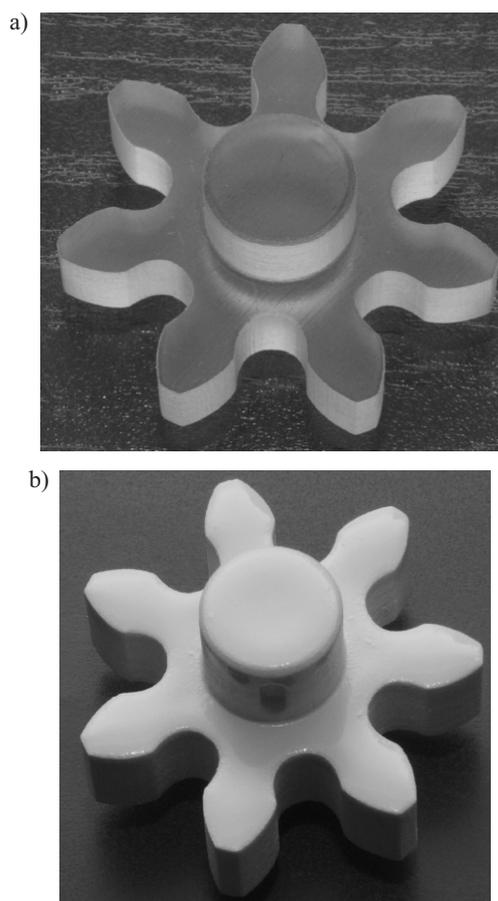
View of gear wheel prototypes made of: a) unfilled EP, b) EPBP1K-3.0
